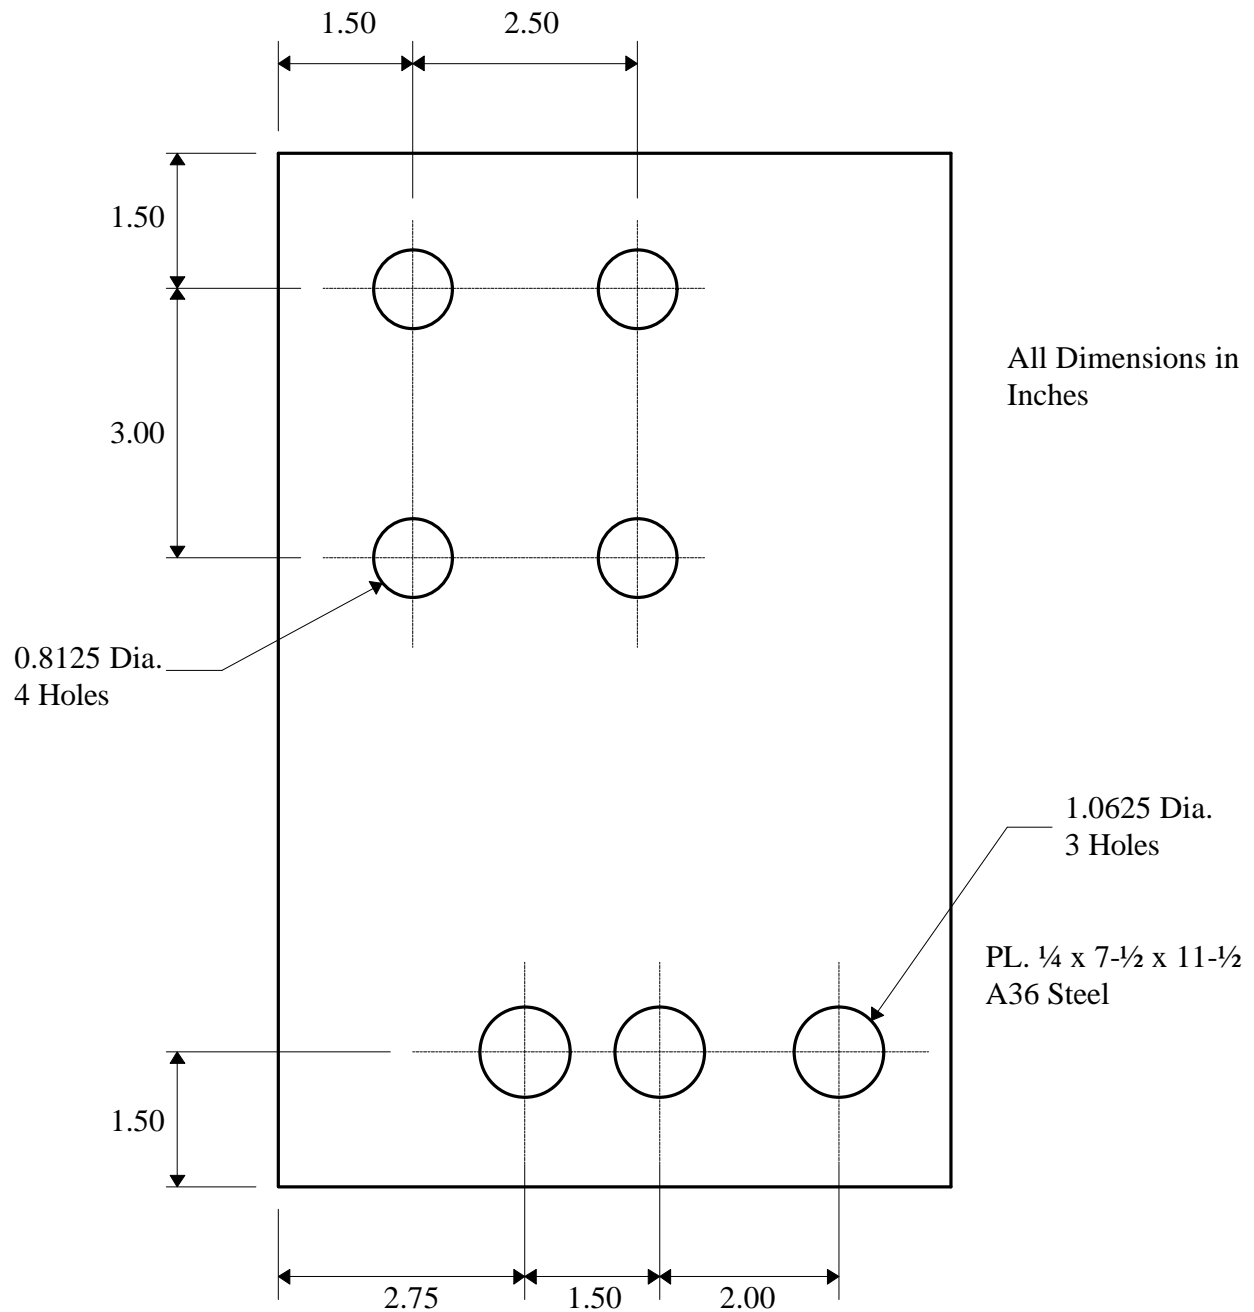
Dimensions of grip plate for the 2x6 test specimens.
